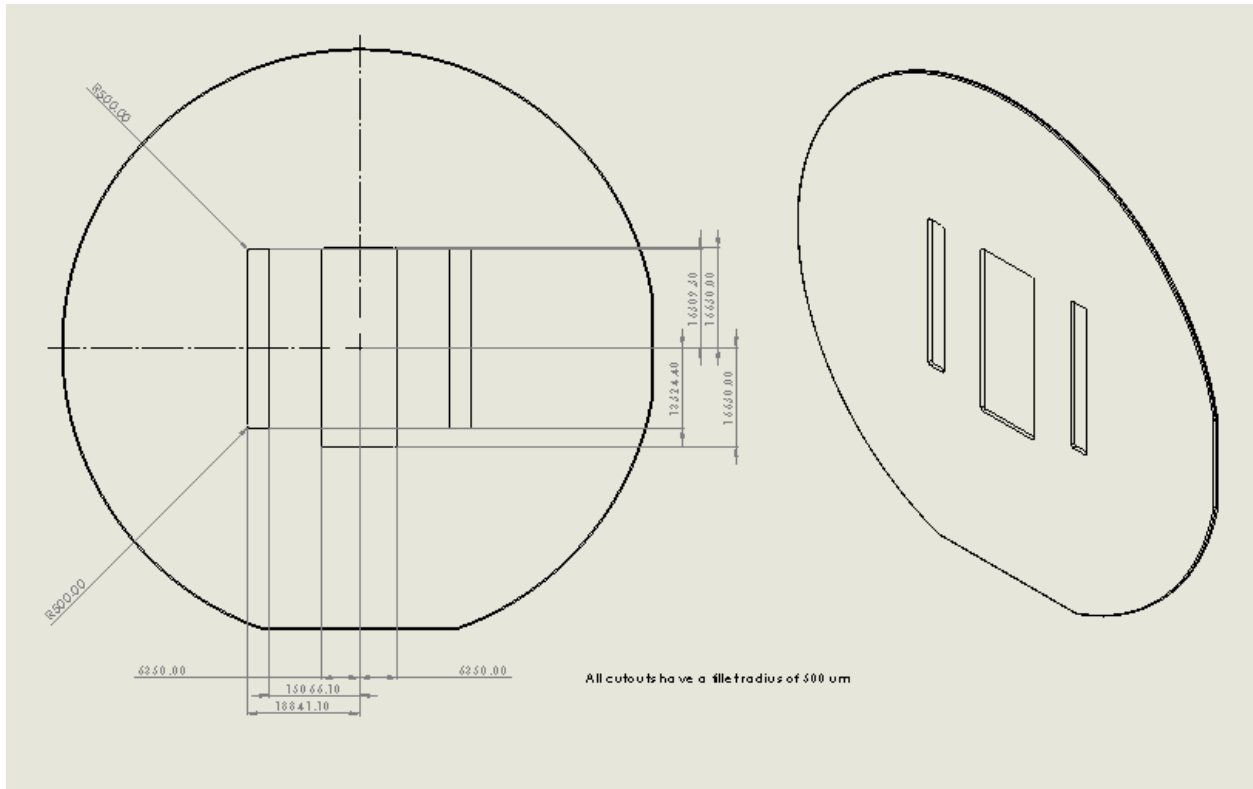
Solidworks model of the laser cut ceramic wafer with dimensions in μm
